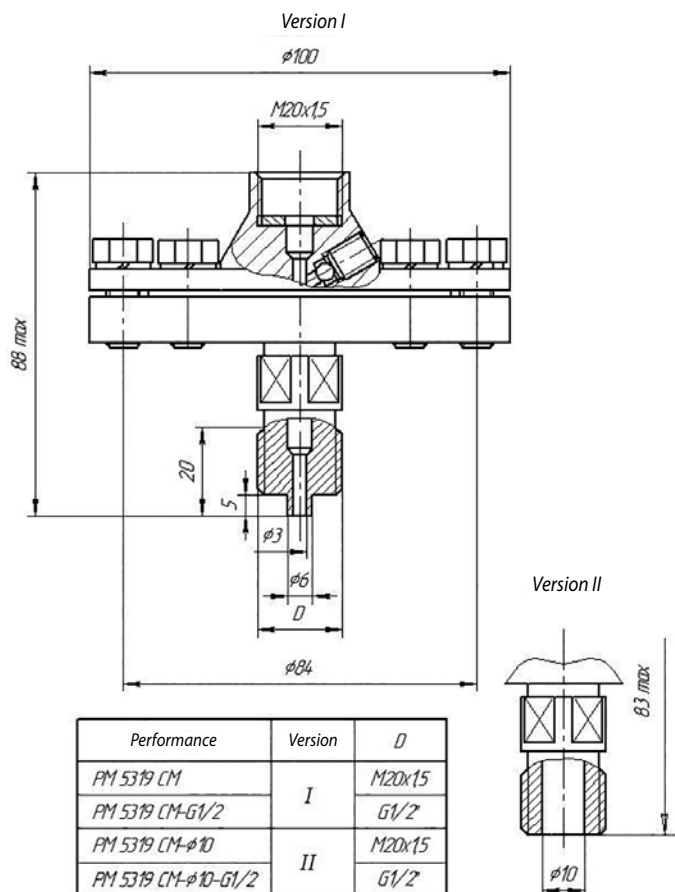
Structure, overall and attachment dimensions of PM 5319 CM
